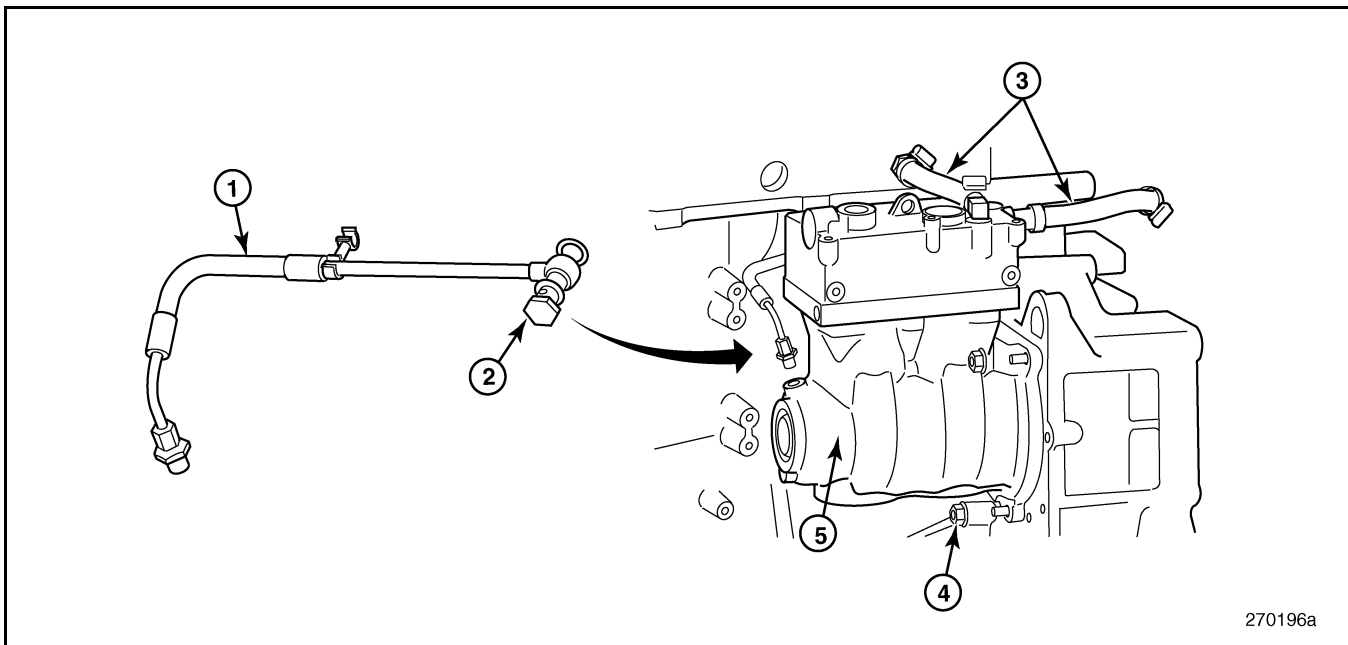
Air Compressor Coolant and Lubrication Fittings
